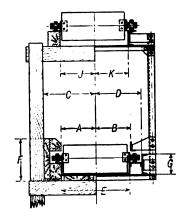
Two-Strand Flight Conveyor with Steel Roller Chain.—Table 7.
